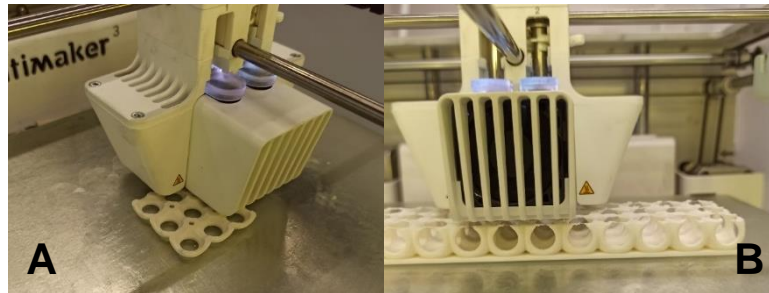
Specimens being manufactured (A) cubic compression specimen (B) sandwich panel bending specimen
